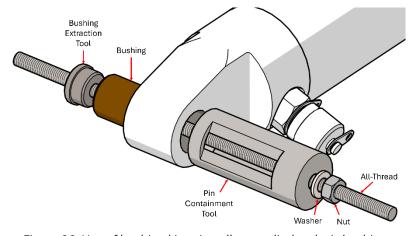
Use of bushing kit to install rear cylinder clevis bushing
